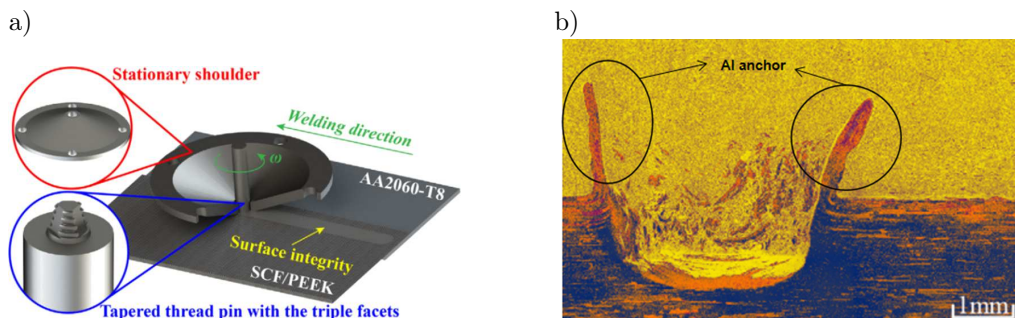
a) Schematic picture for FSW based on the novel welding [26]; b) macro-structure in cross-section of typical joints under 1600 r/min.
